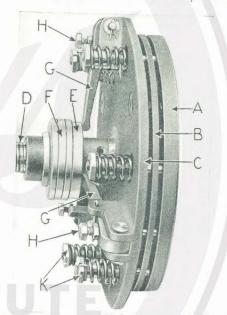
CLUTCH OF THE 11 H.P. "STANDARD" CAR REMOVED FROM THE ENGINE FLYWHEEL.
